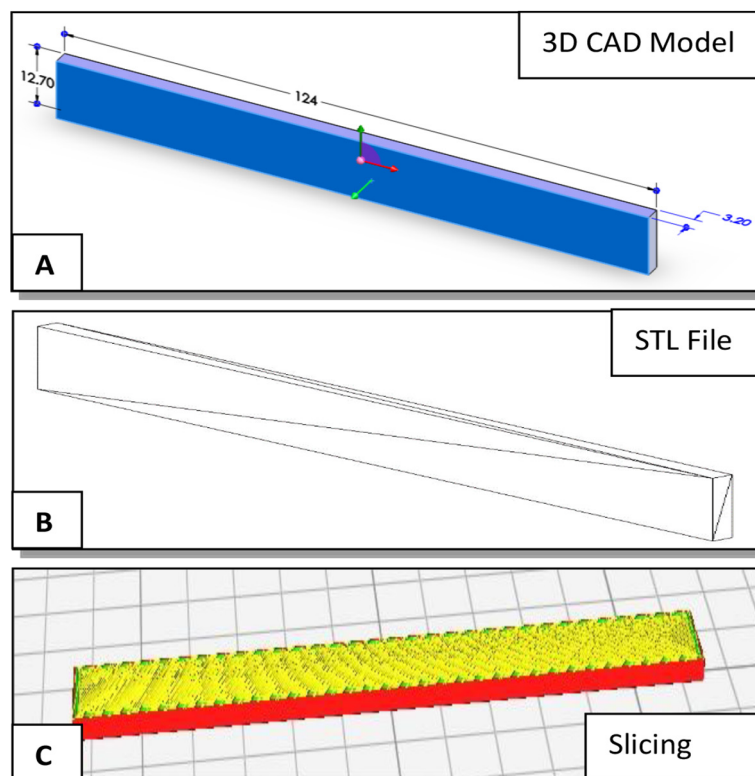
(A) 3D CAD model of 3-point bending specimen (all dimensions in mm), (B) STL file SolidWorks specimen, (C) slicing the specimen by using QIDISlicer software
